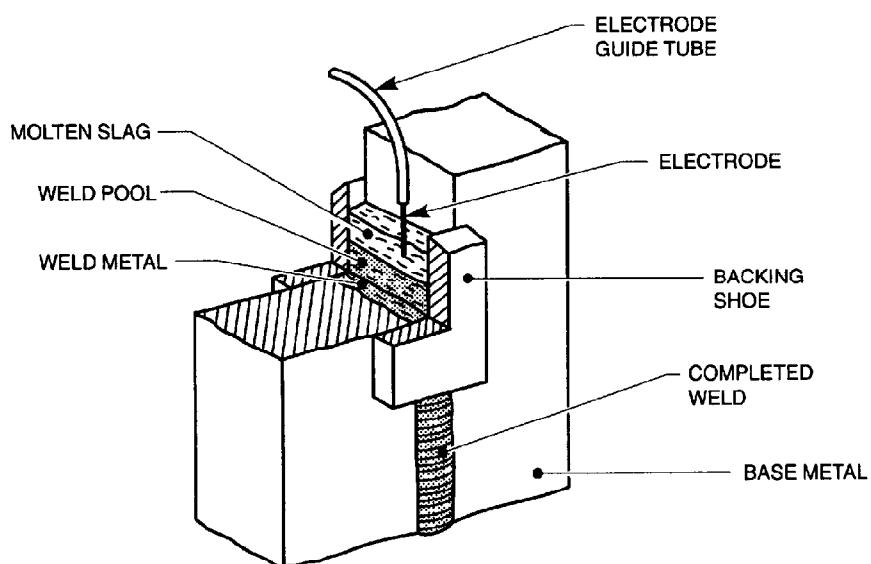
Typical Arrangement for Electroslag Welding Process Nomenclature
